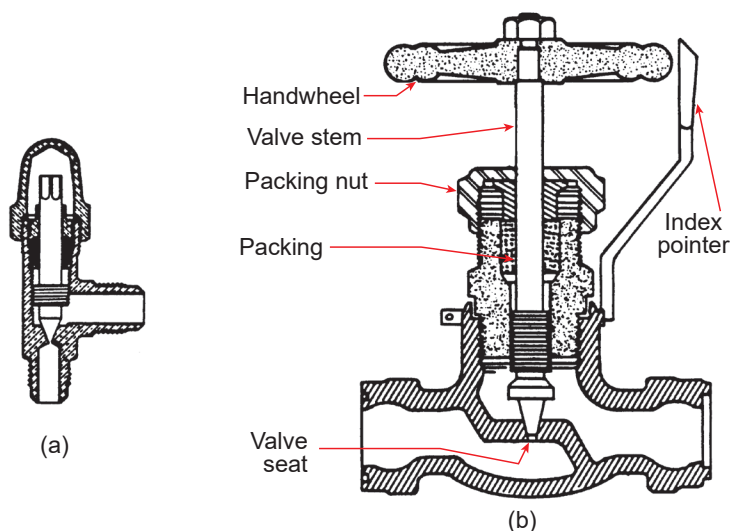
(a) is a manual expansion valve used in small capacity refrigerating systems. Depending on the refrigerant, it may be made of brass or stainless steel. It is connected to the piping system by flared compression fittings, threading, or welding.
